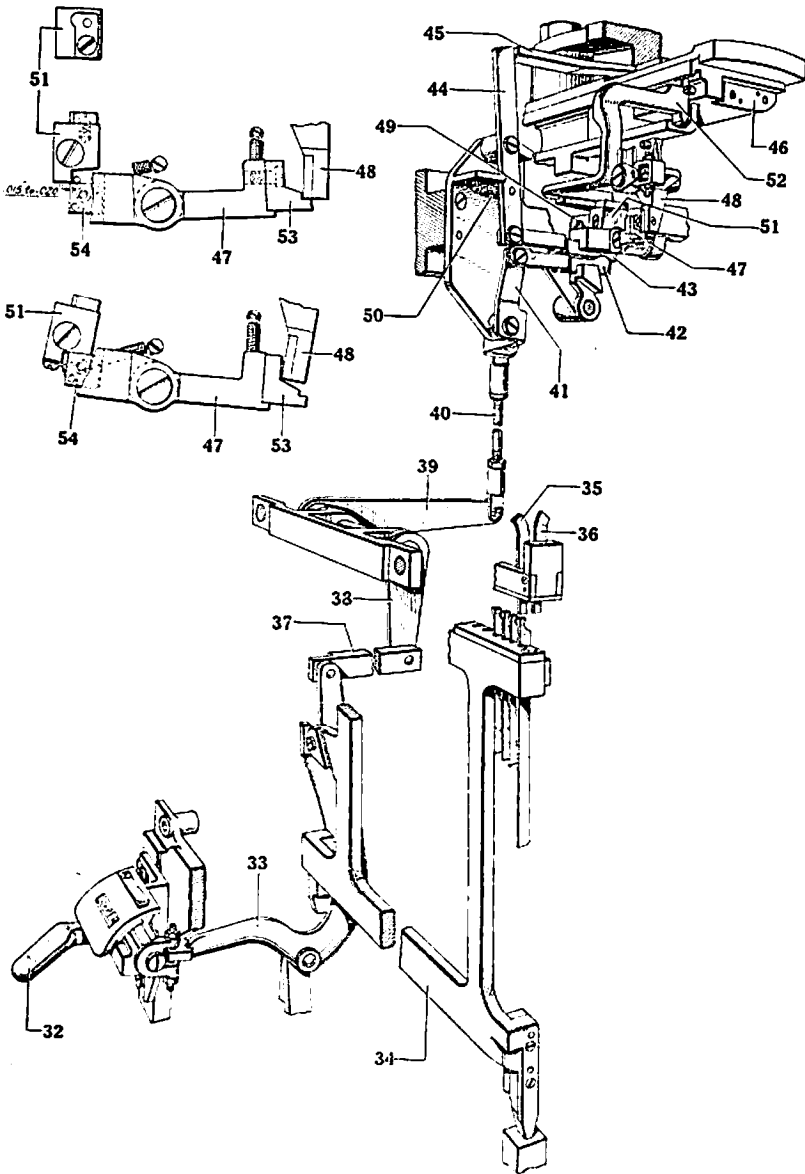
Distributor Box Clutch Tripping Mechanism and Related Parts in Assembly. The two detail drawings illustrate the lock 51 and the block 54 which prevent the distributor box from being moved until all the matrices of the last line set have passed through the box.
